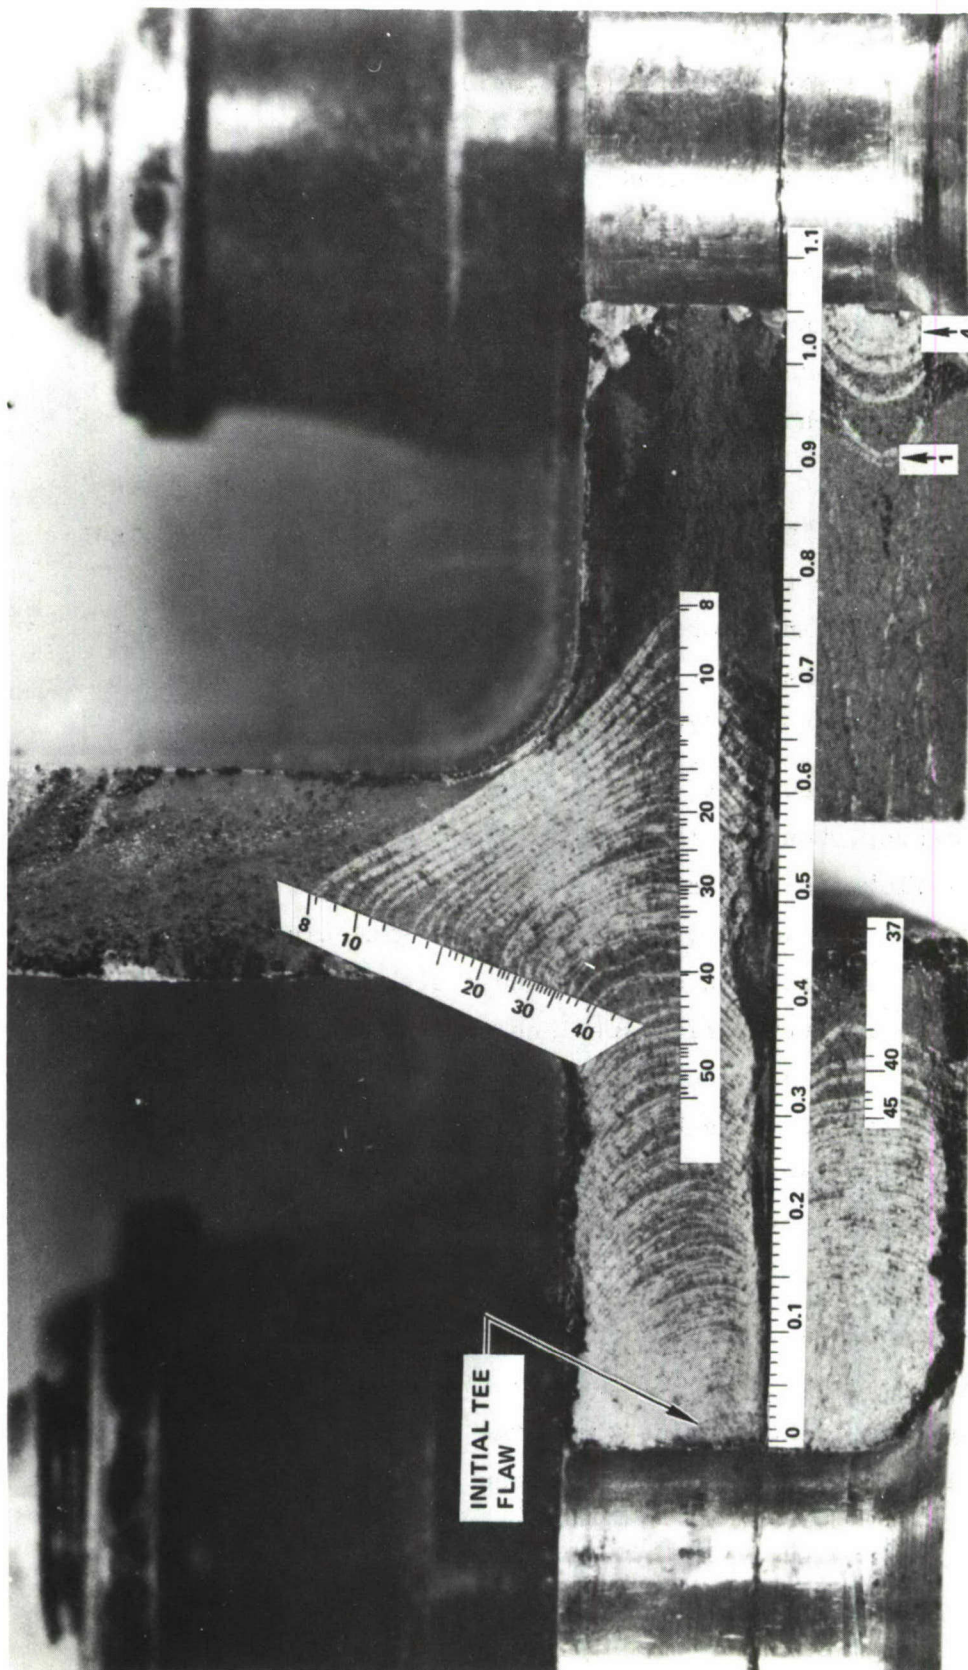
Close-Up of Fracture Surface Markings on Specimen 4.8-3-2
